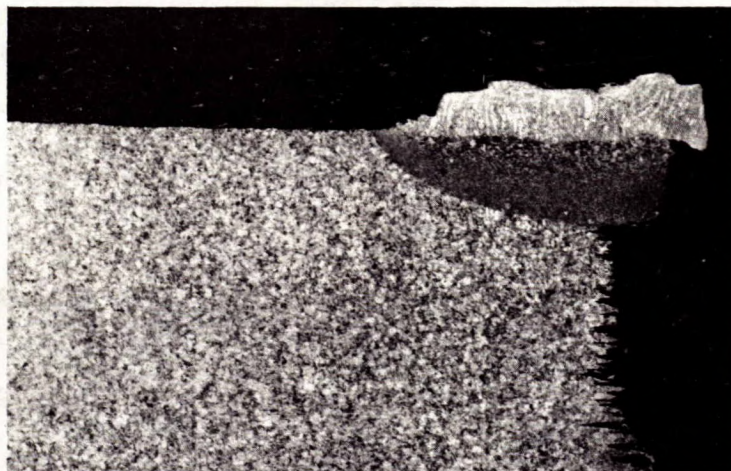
Mating Fracture Surfaces of a Geco "Top-Hat" Mineshaft Guide. (X 1/2)
